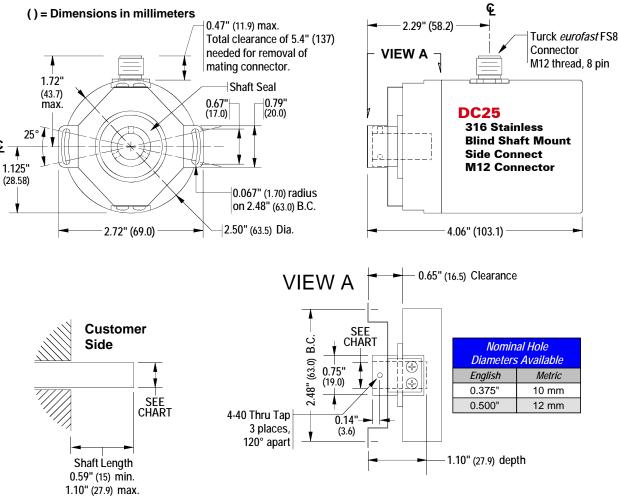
316 Stainless Steel Body, Blind Shaft Mount, Side Connect Outline Drawing
